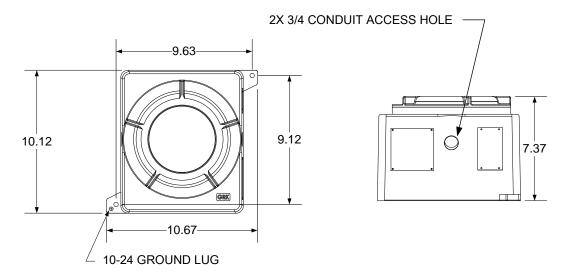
Explosion-Proof AC Power Supply Top/Front Dimensions
